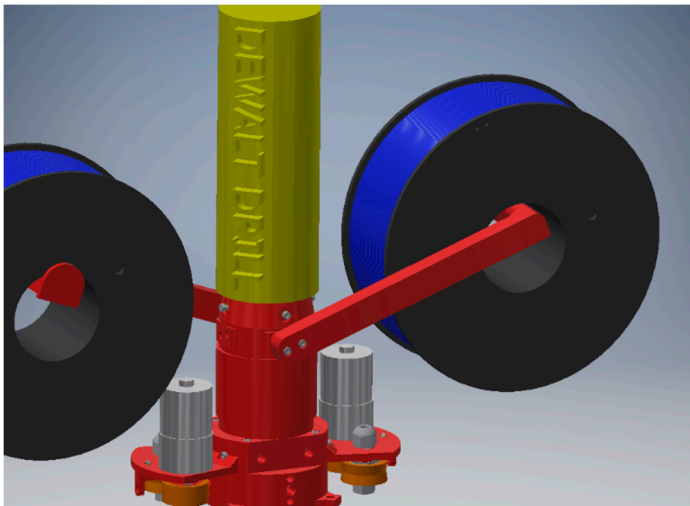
Rendering of the details of the spool arms of the open-source 3-D printable pelletizer chopper.
